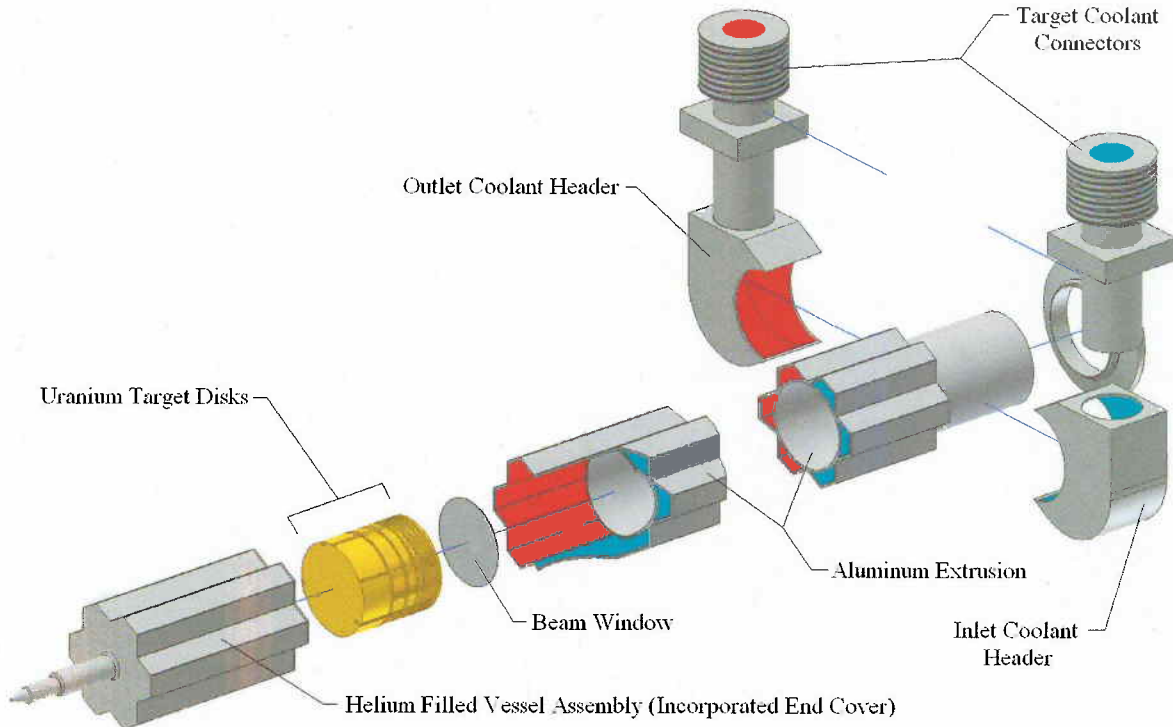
Exploded target assembly cutaway for an electron beam with circular cross section
